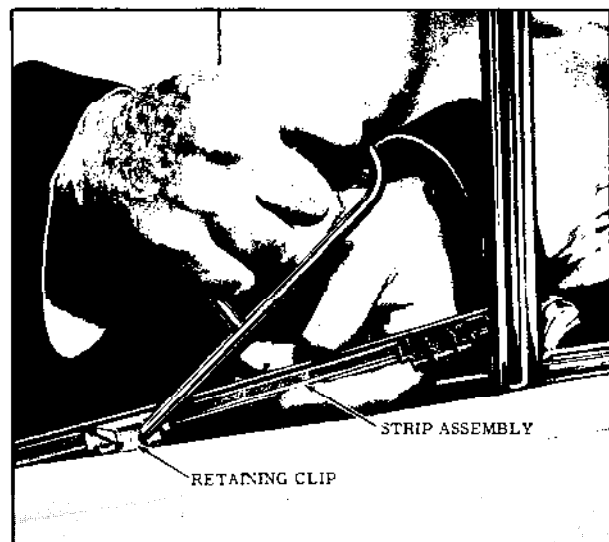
Door Window Glass Run Channel Inner and Outer Strip Assemblies (Outer Strip Shown - Inner Typical)
